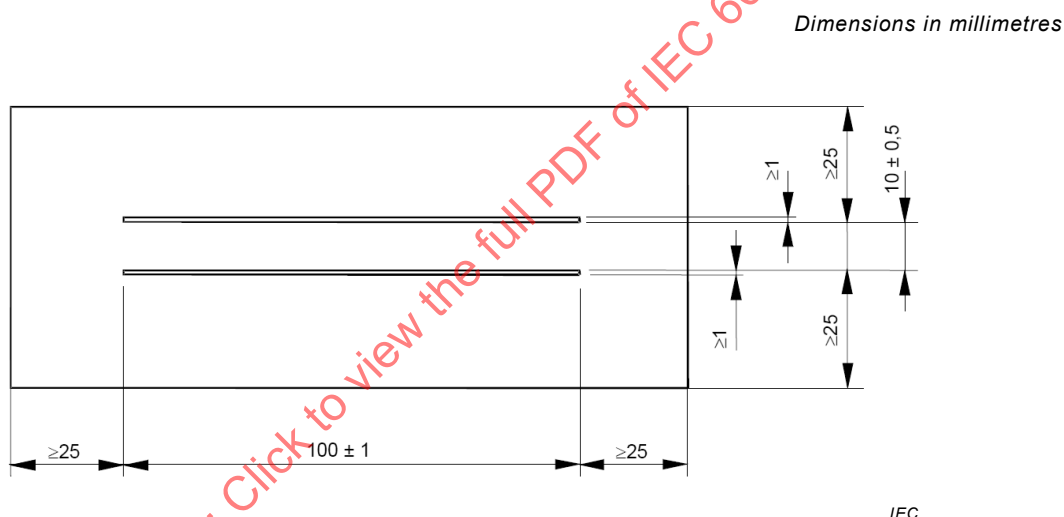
Test sample with applied electrodes (dimensions in mm)
